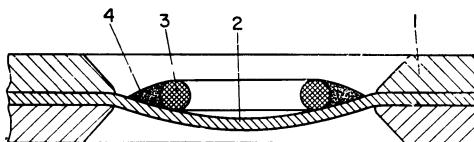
Etching process: (1) frame; (2) anodized foil; (3) O-ring; (4) varnish
